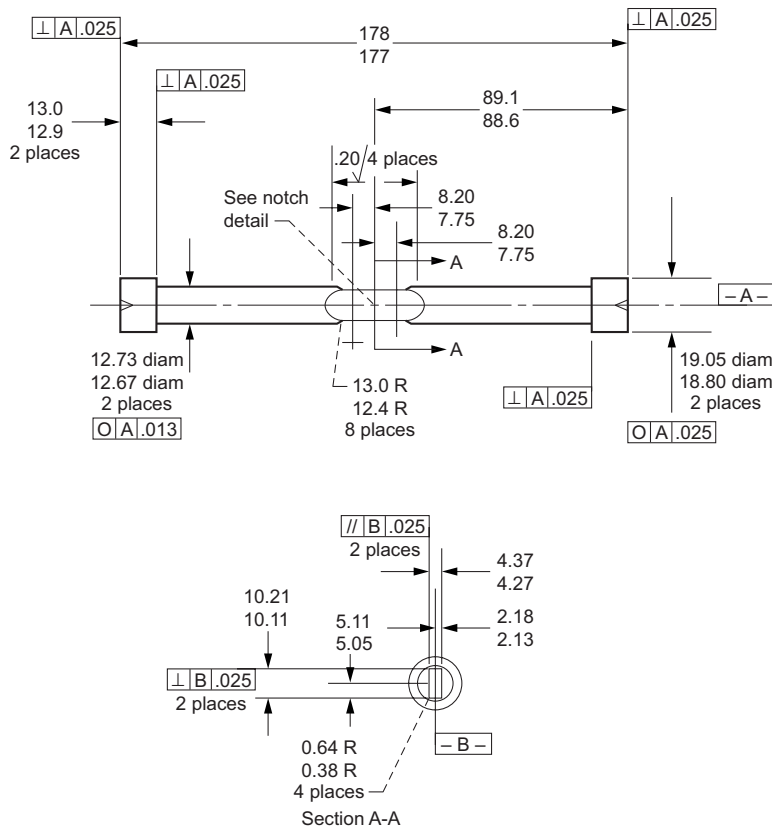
Surface flaw ( $K_b$ ) specimen geometry for the GXMM247 fatigue crack growth tests at 649°C. Dimensions are in millimeters.
